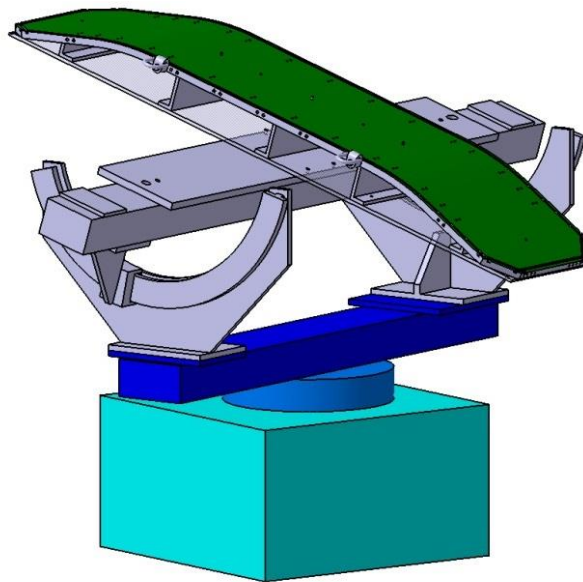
Winding table for coil 3-4, installed on the winding machine.
